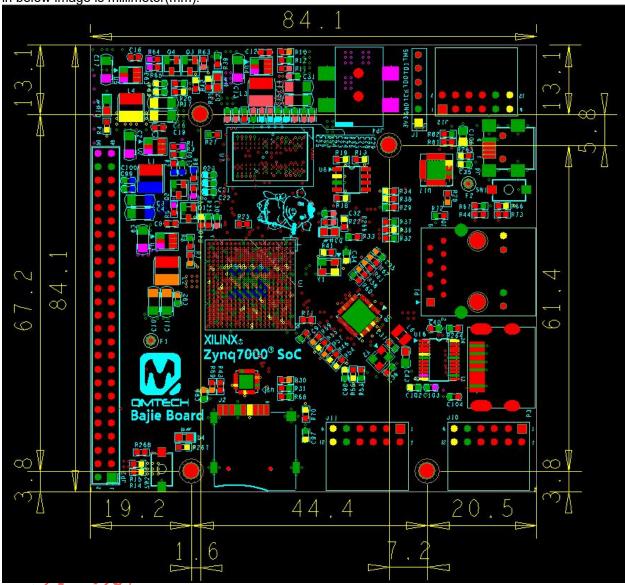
QMTECH ZYNQ7000 Bajie Board Dimension
